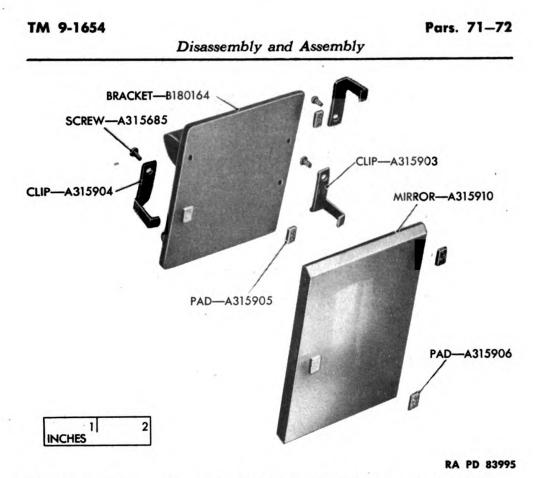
Lower Mirror Bracket Assembly C82371 - Exploded View
